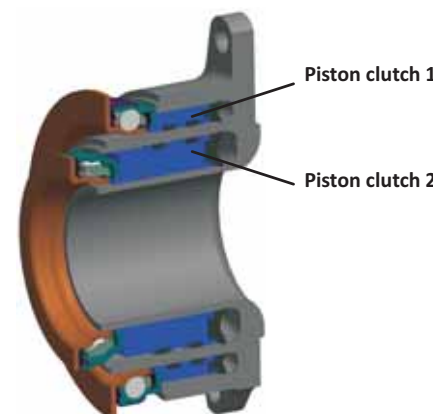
Hydraulic central engager with two ring pistons for a double clutch
